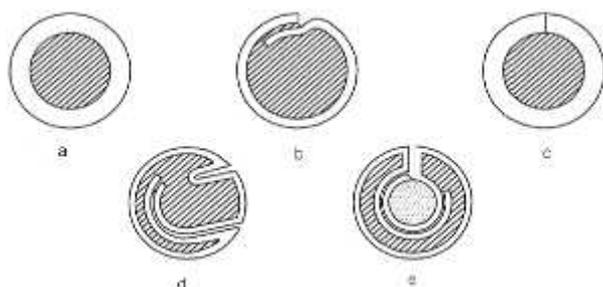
Types of tubular electrode sealing profiles to welded pipe, b-pipe with rolling, pipe rolling c-butt Folding d-bore, double-barrelled e-Folding
